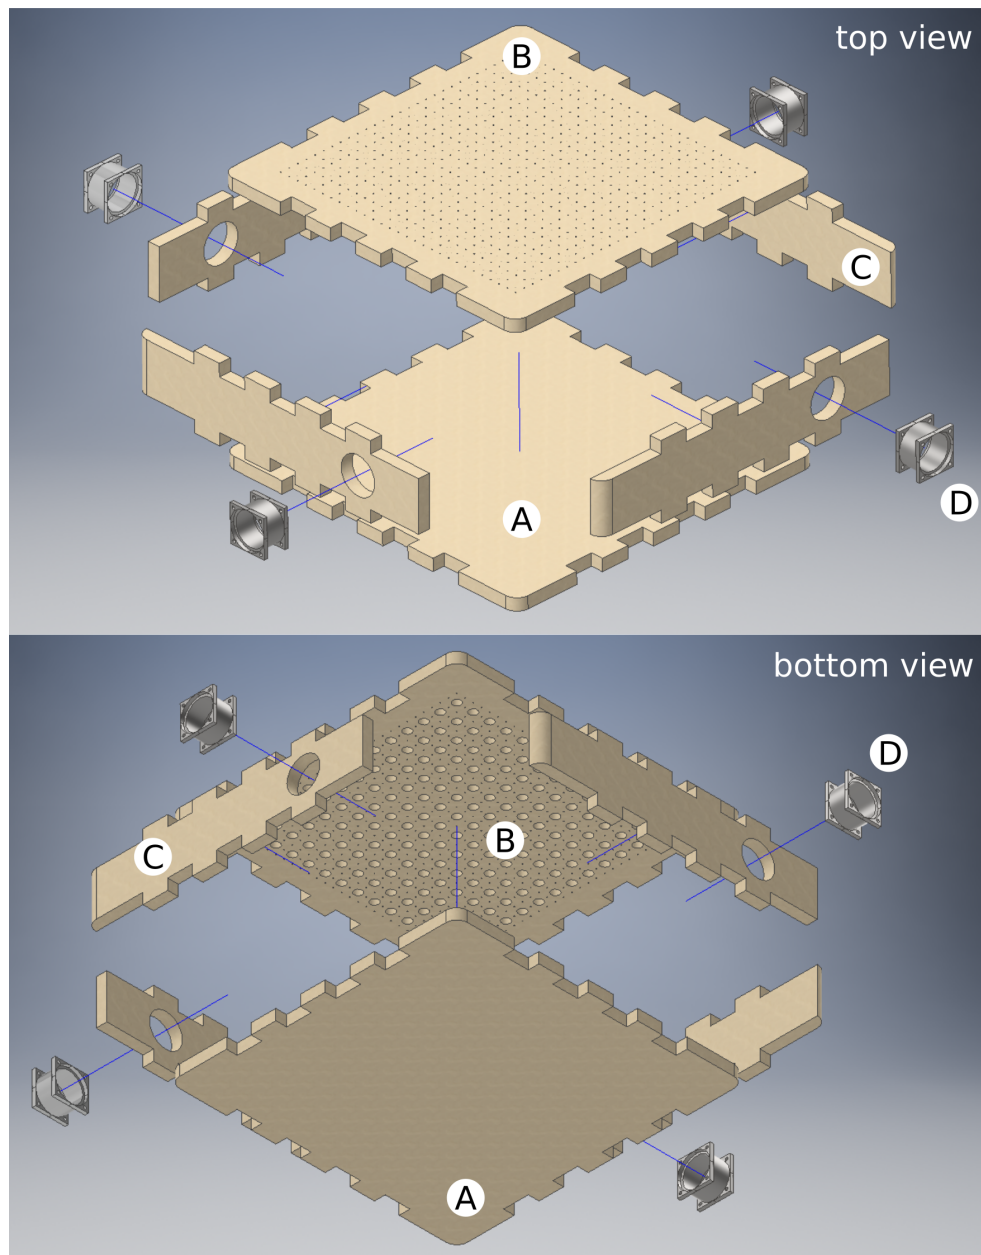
The magnet levitation table consists of: A) bottom layer; B) top surface; C) four side walls; and D) four fans. The side walls are inserted into the bottom layer and the top surface closes the chamber. Appendix C contains the technical drawings of the magnet-levitation table.
